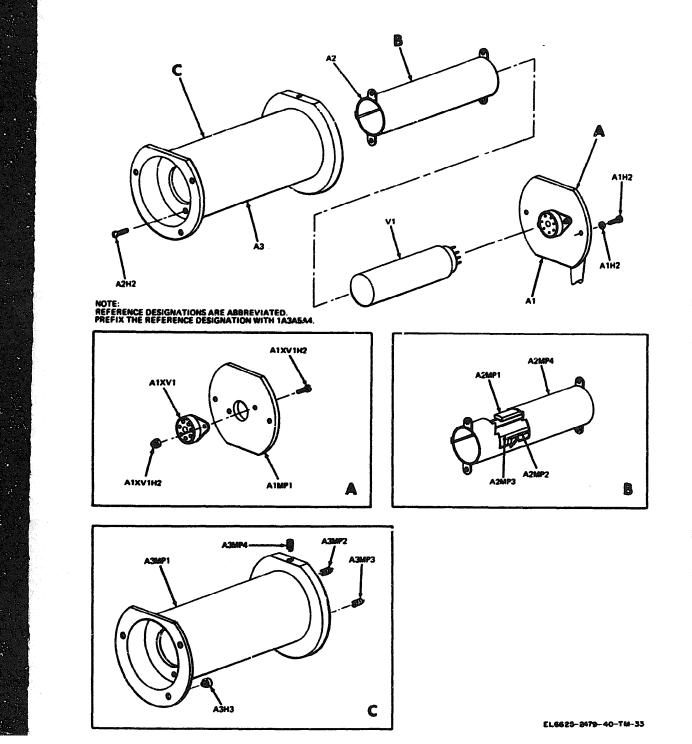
Tube housing assembly 1A3A5A4, parts location.
